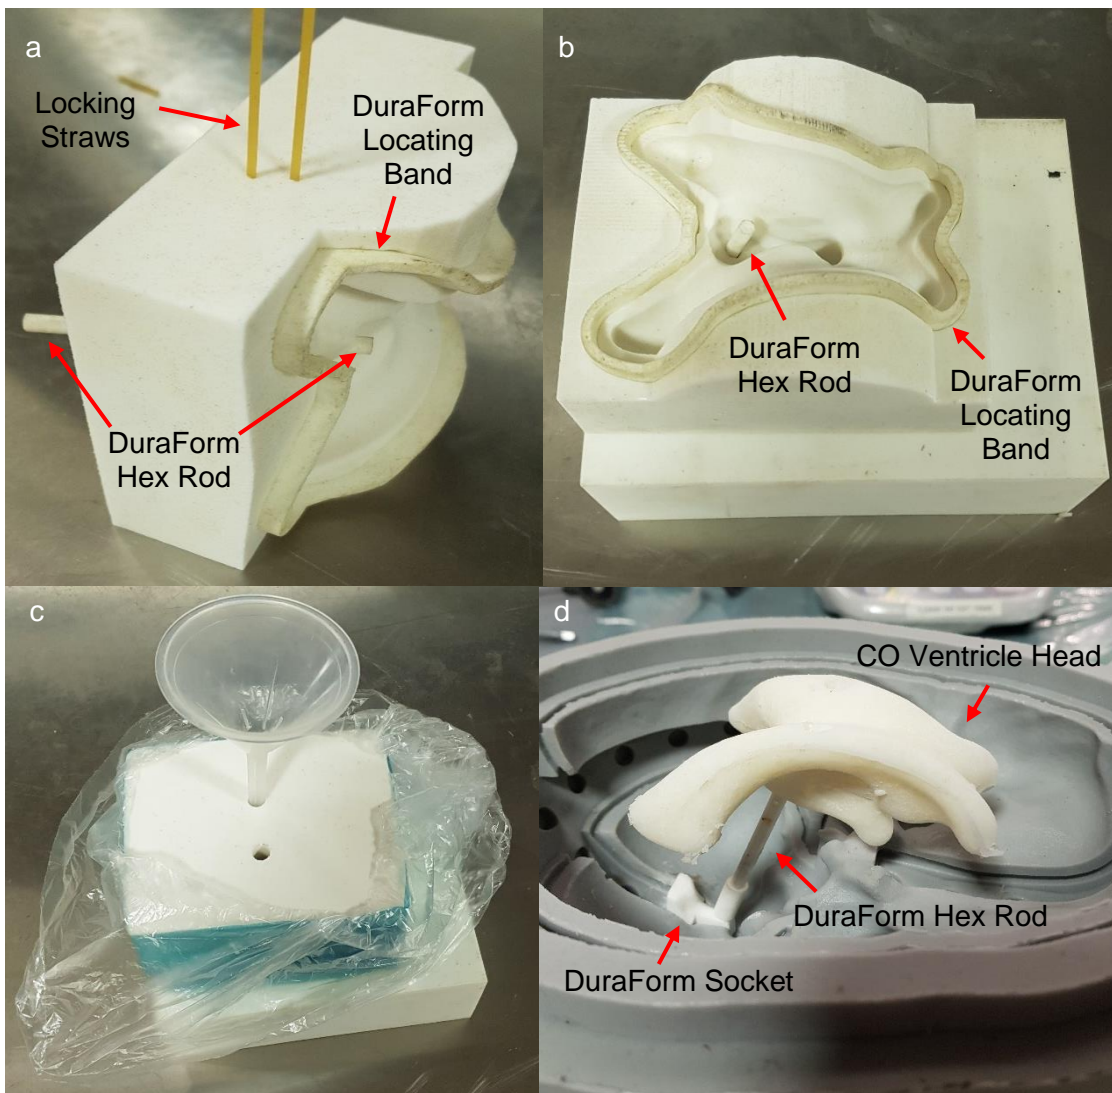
Mould assembly and successful demoulding of V3 ventricles. a) bottom section of V3 mould with locating band and hex rod in place; b) top-down view of bottom section of V3 mould; c) assembled mould on stand; d) cast ventricle inserted into lower half of CBM.
